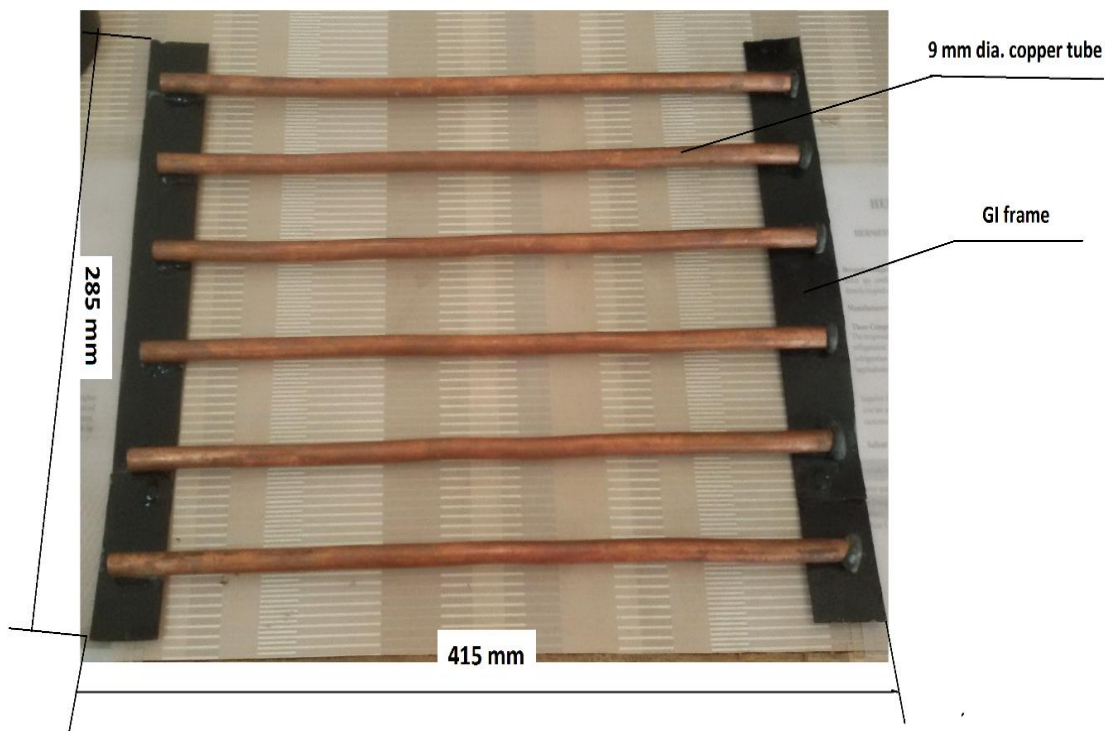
The design of the tube type heat storage PCM heat exchanger.
